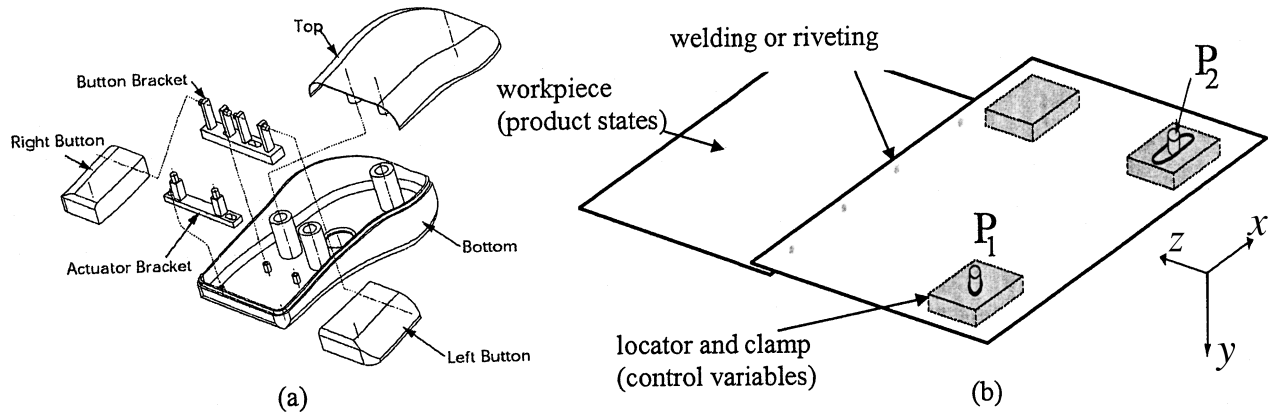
(a) Type-I assembly; and (b) type-II assembly.
